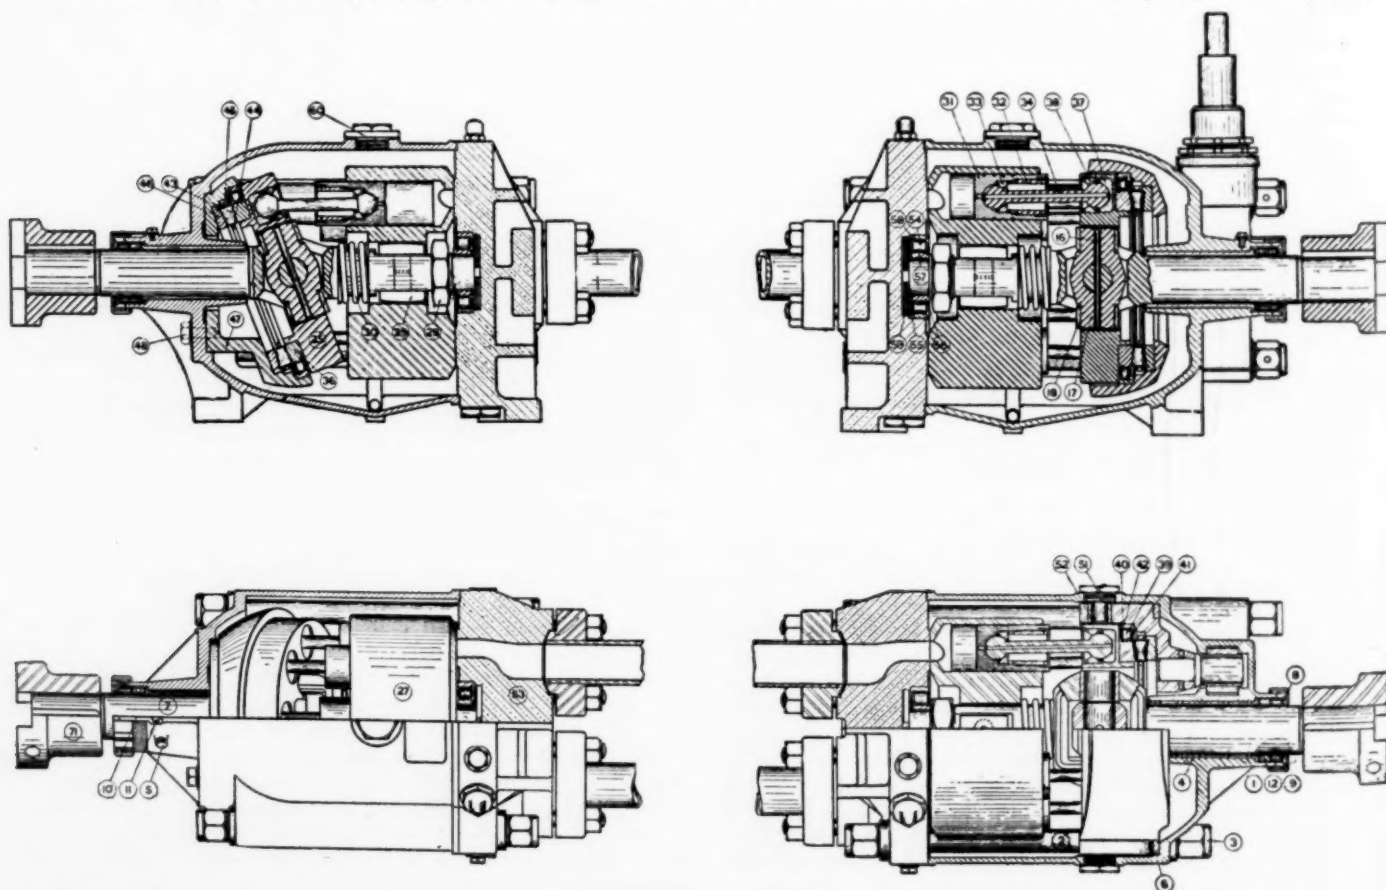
PUMP UNIT (RIGHT) AND MOTOR UNIT (LEFT) OF THE WATERBURY HYDRAULIC VARIABLE-SPEED GEAR ON GASOLINE SWITCHING LOCOMOTIVE OF UNIVERSAL ENGINEERING CORPORATION
